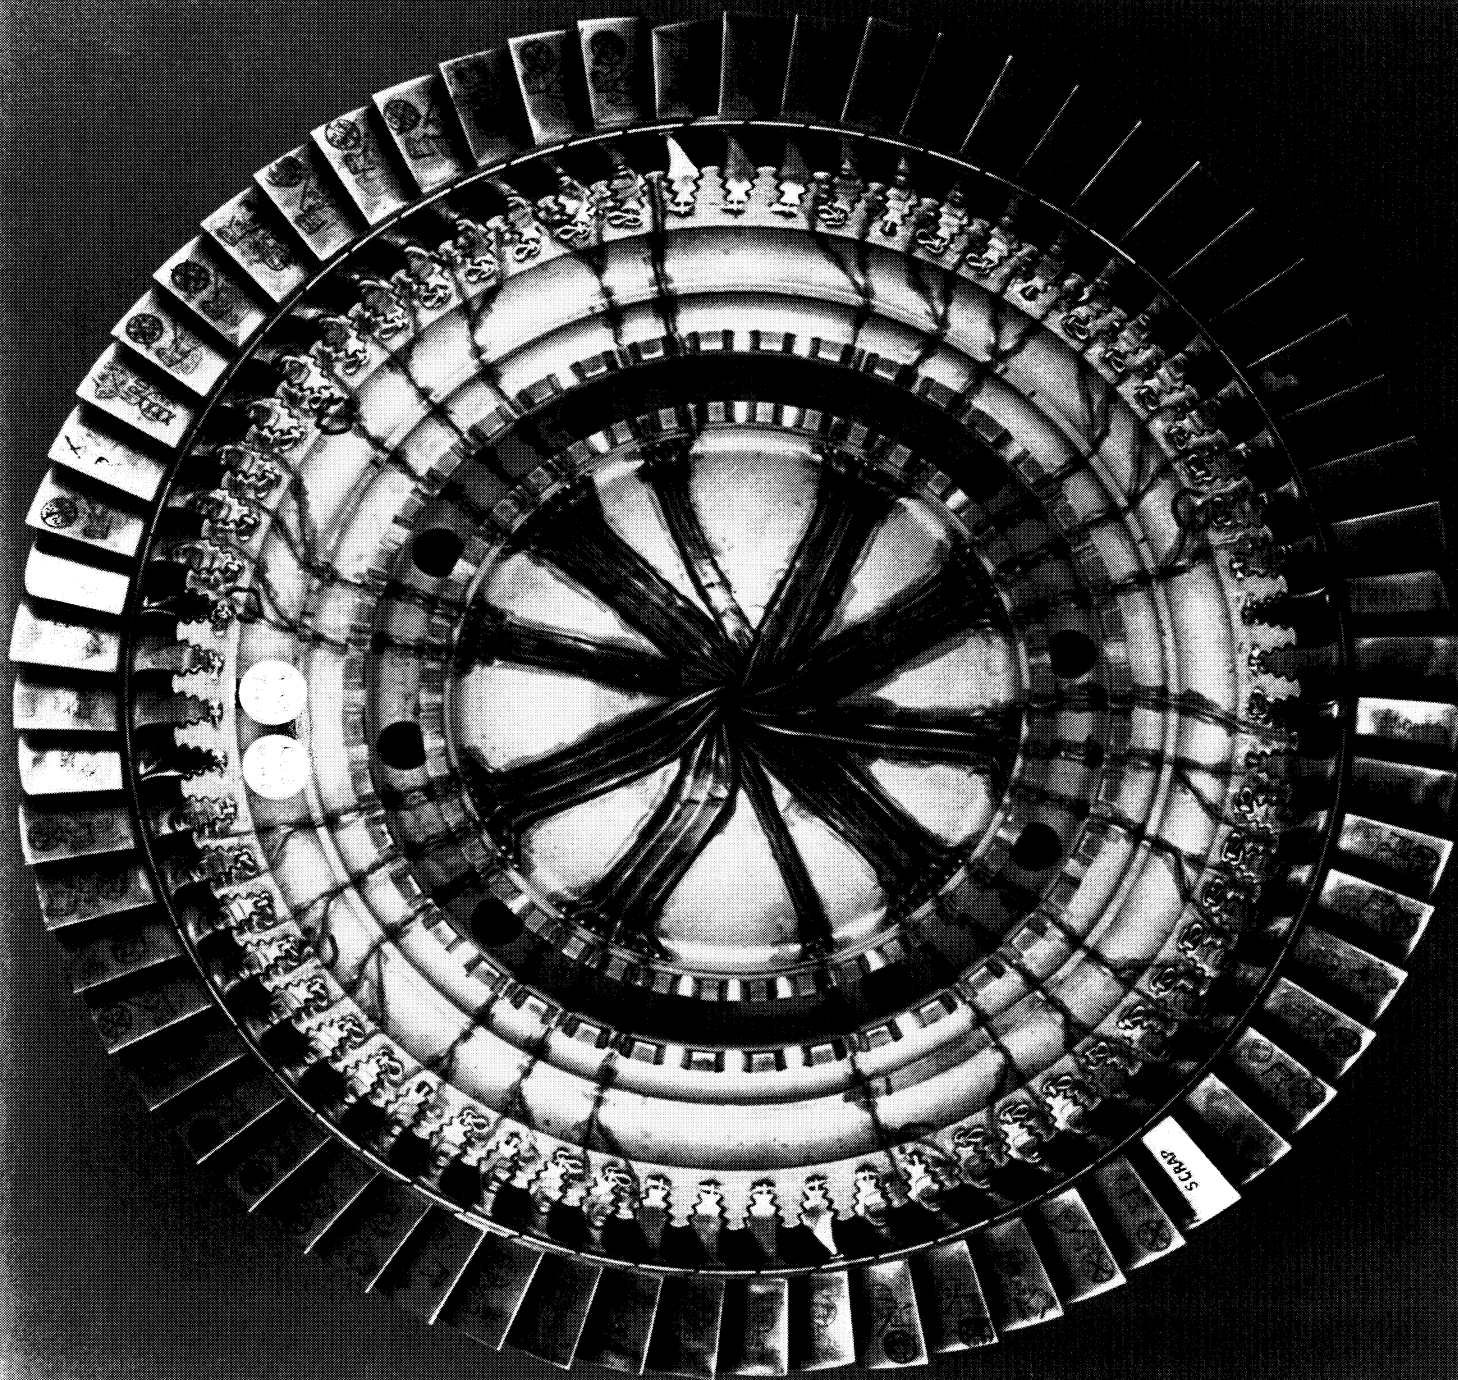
Jumper Wire Connecting Gage to Wired Wheel
